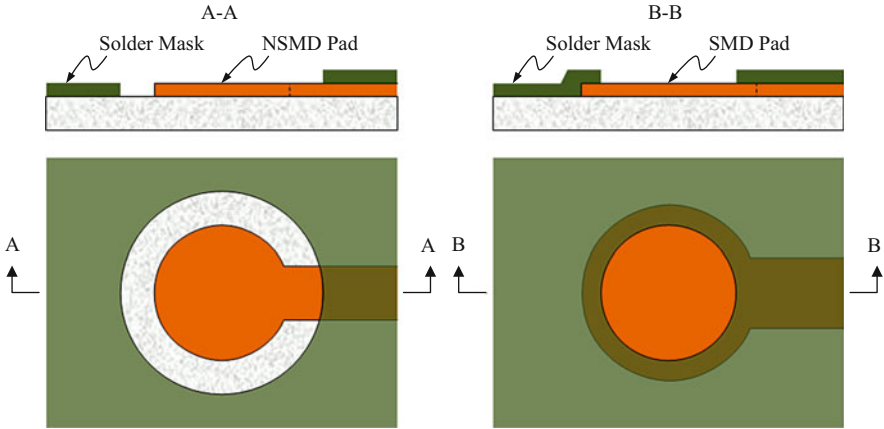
Top view and cross-sectional view of NSMD and SMD PCB pad designs and solder wetting on sidewalls of NSMD pad and solder neck on SMD pad
